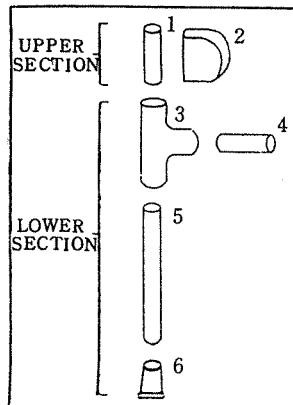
Components of the FAD crutch. Upper section: 1) PVC pipe and 2) front-opening cuff. Lower section: 3) "T" connector. 4) PVC pipe handpiece. 5) PVC pipe upright and 6) crutch tip.
